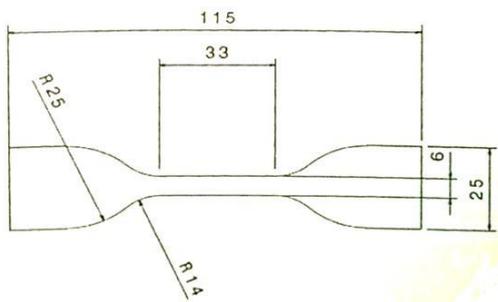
Schematic drawing of ASTM D412 samples with units in mm.
